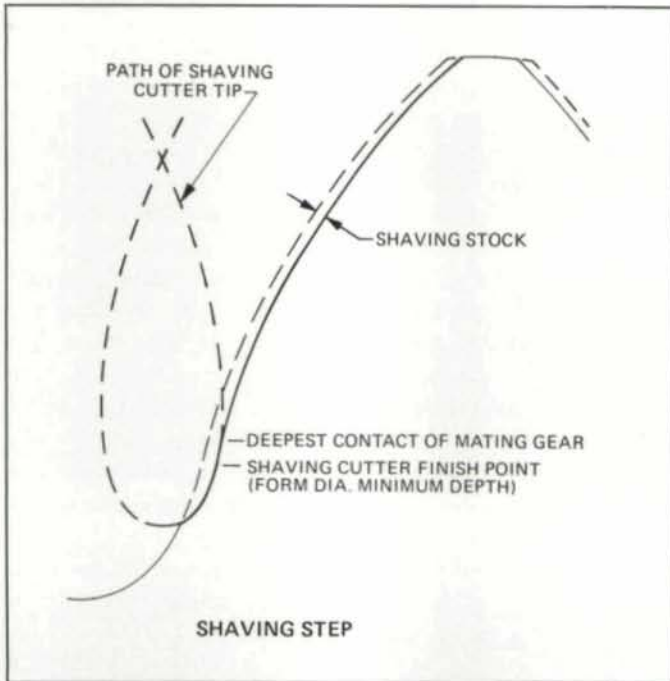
A step in the gear tooth flank will result if the profile in the vicinity of the fillet diameter is not relieved in any way.
